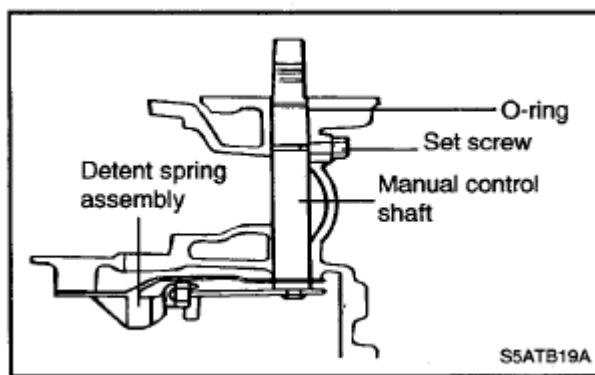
Identifying Manual Control Shaft Assembly, Sprag Rod, Set Screw, & Detent Spring Assembly
